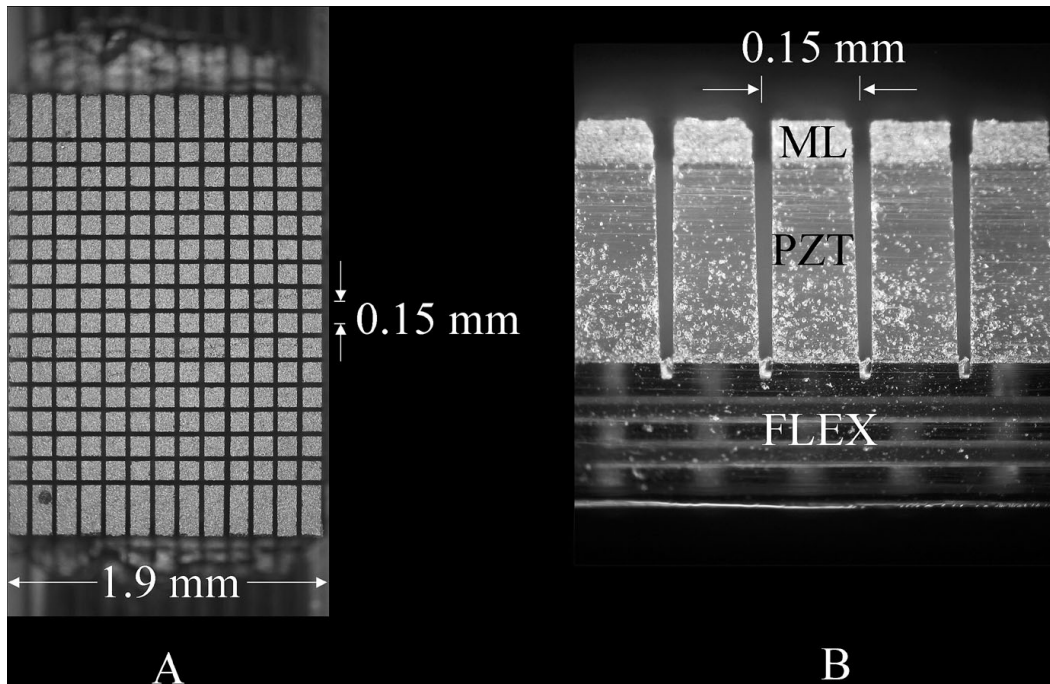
(A) Top view of the 7FnoML diced array. (B) Side view of the diced 7FML array.
